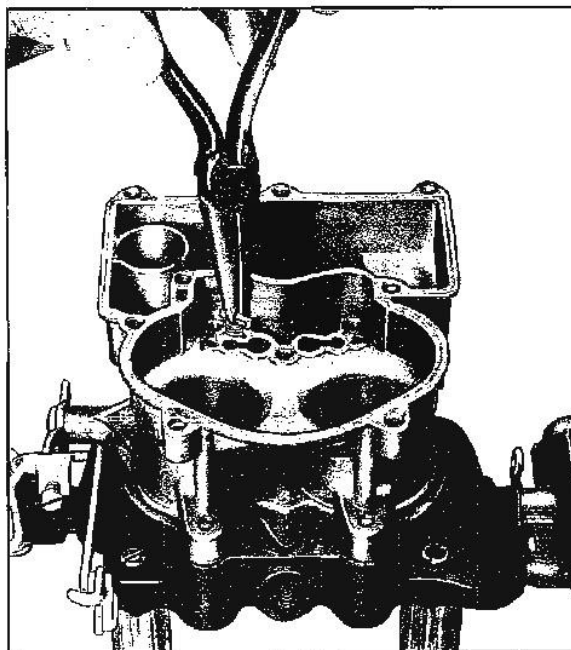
B-49 Removing Pump Discharge Spring Retainer
